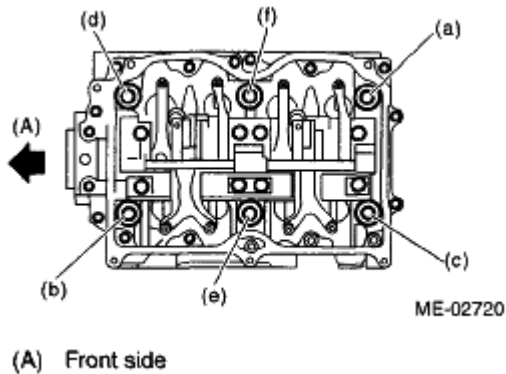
Identifying Removal Sequence Of Cylinder Head Bolts
